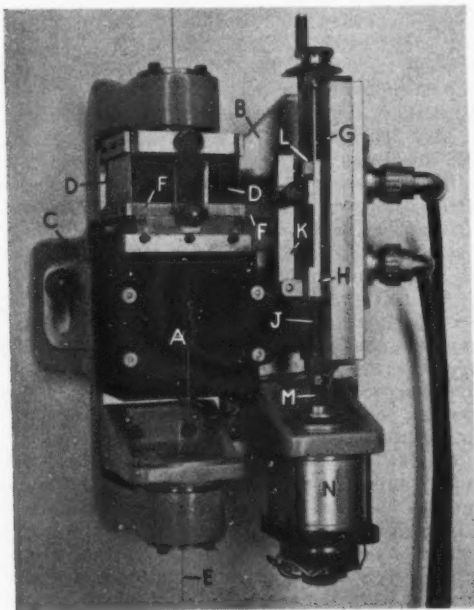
The Measuring Head of the Machine Tool Alignment Recorder Developed by the M.E.R.L.
